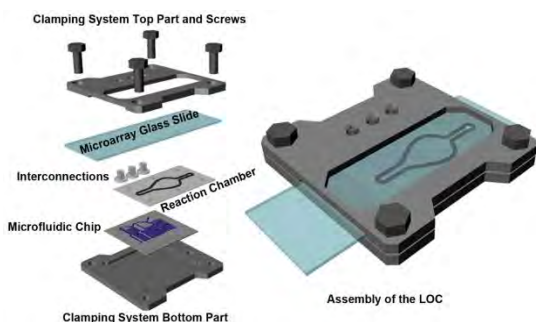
Exploded (left) and Assembly (right) view of the multilevel LOC platform CAD with the clamping system.
